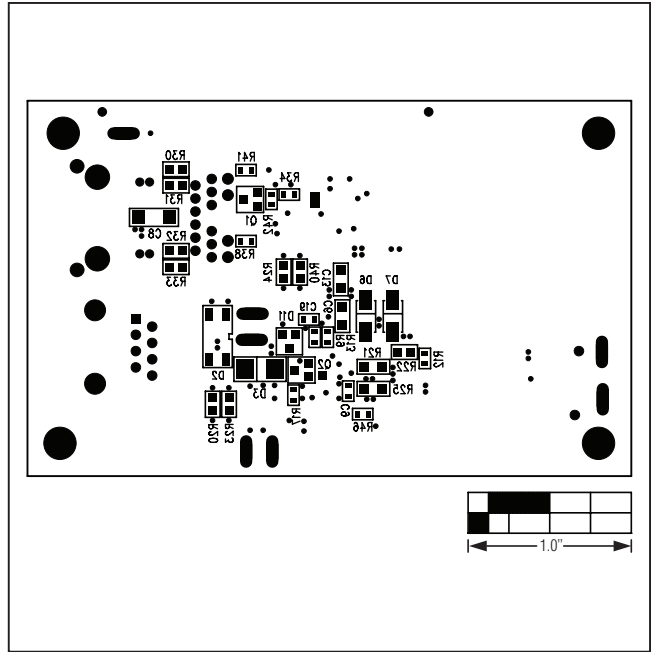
MAX5974E EV Kit Component Placement Guide—Solder Side
